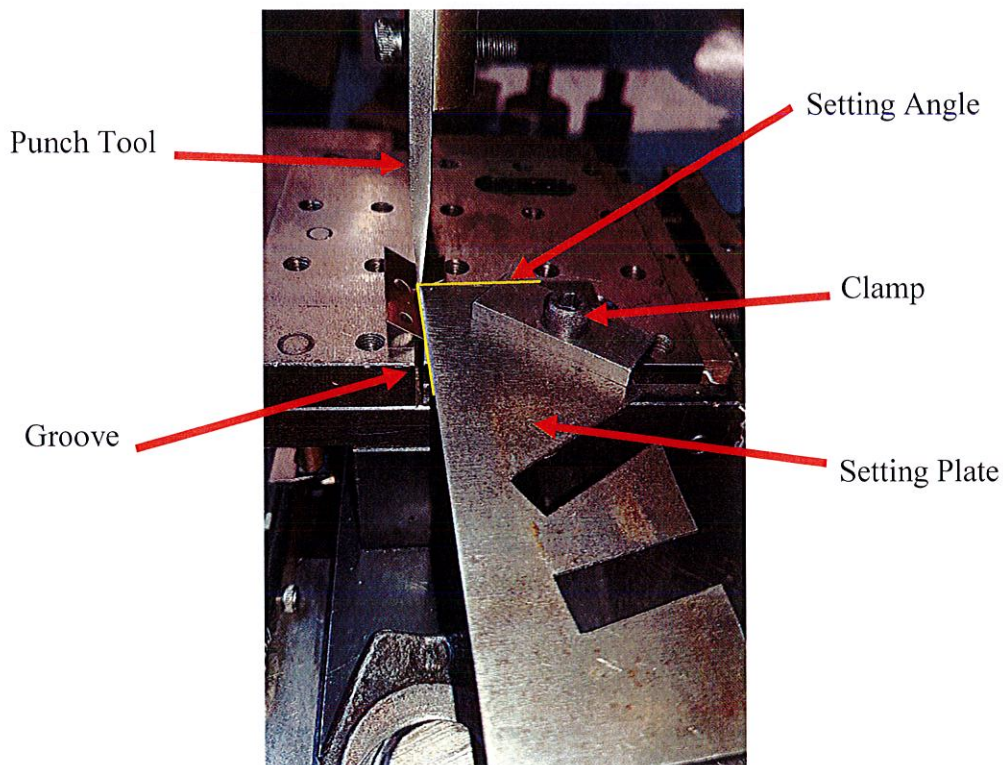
Setting plate shown in position to create the correct angle bent on the component.
